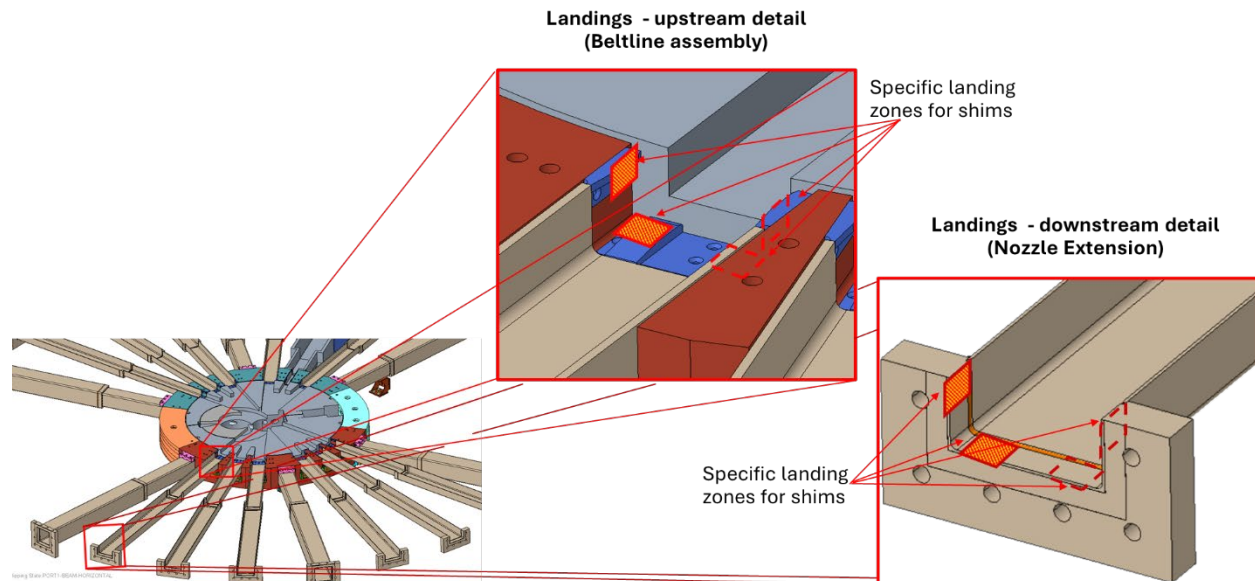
Identified landing zones where Monolith Insert shims will mate with the Nozzle Extension and Beltline assembly
